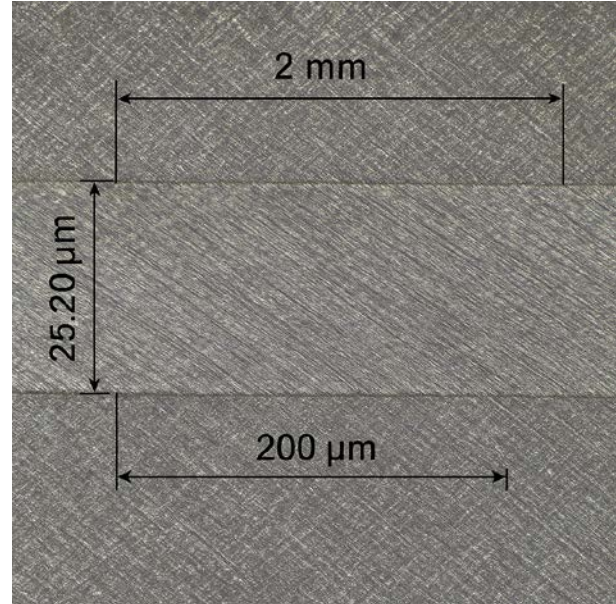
Optical microscope image showing surface texture and dimensional measurements of machined mild steel.
